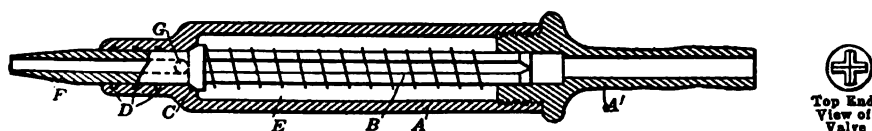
NONLEAKING OILER FOR TRAMWAY BUCKETS.
